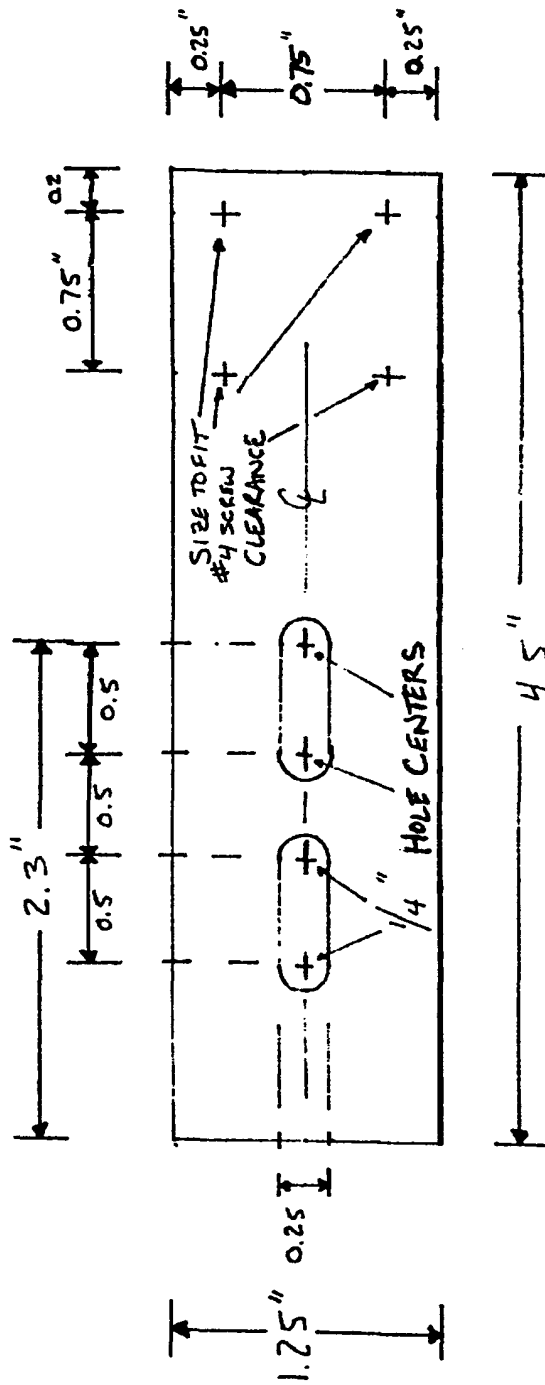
Mechanical drawing of aluminum support which attaches the horizontal stage to the steel posts.
